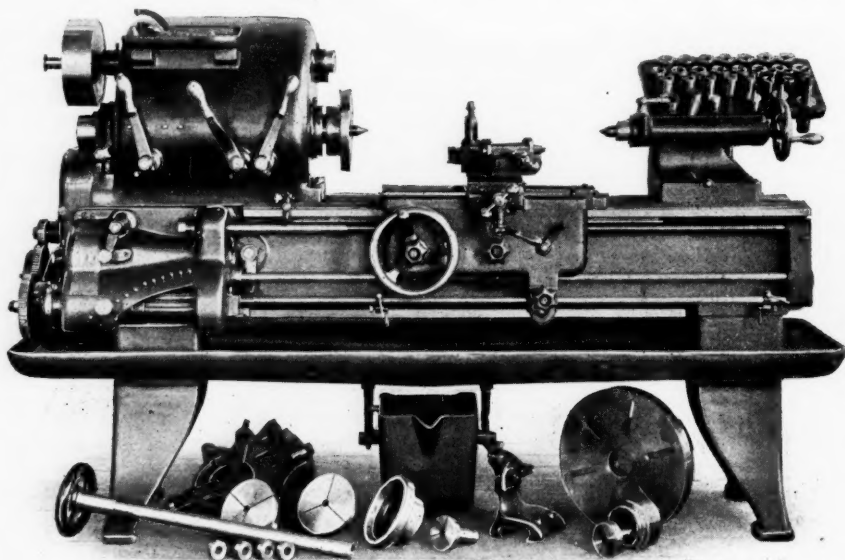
Front View of Pratt & Whitney Single Pulley Gear-driven Lathe.
